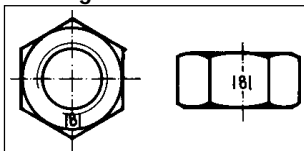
Hexagon nuts ≥ M 5 shall be marked with the symbol of the property class, a vertical bar on either side of the symbol and the trade (identification) marking of the manufacturer on the bearing surface or side (fig. 1)
